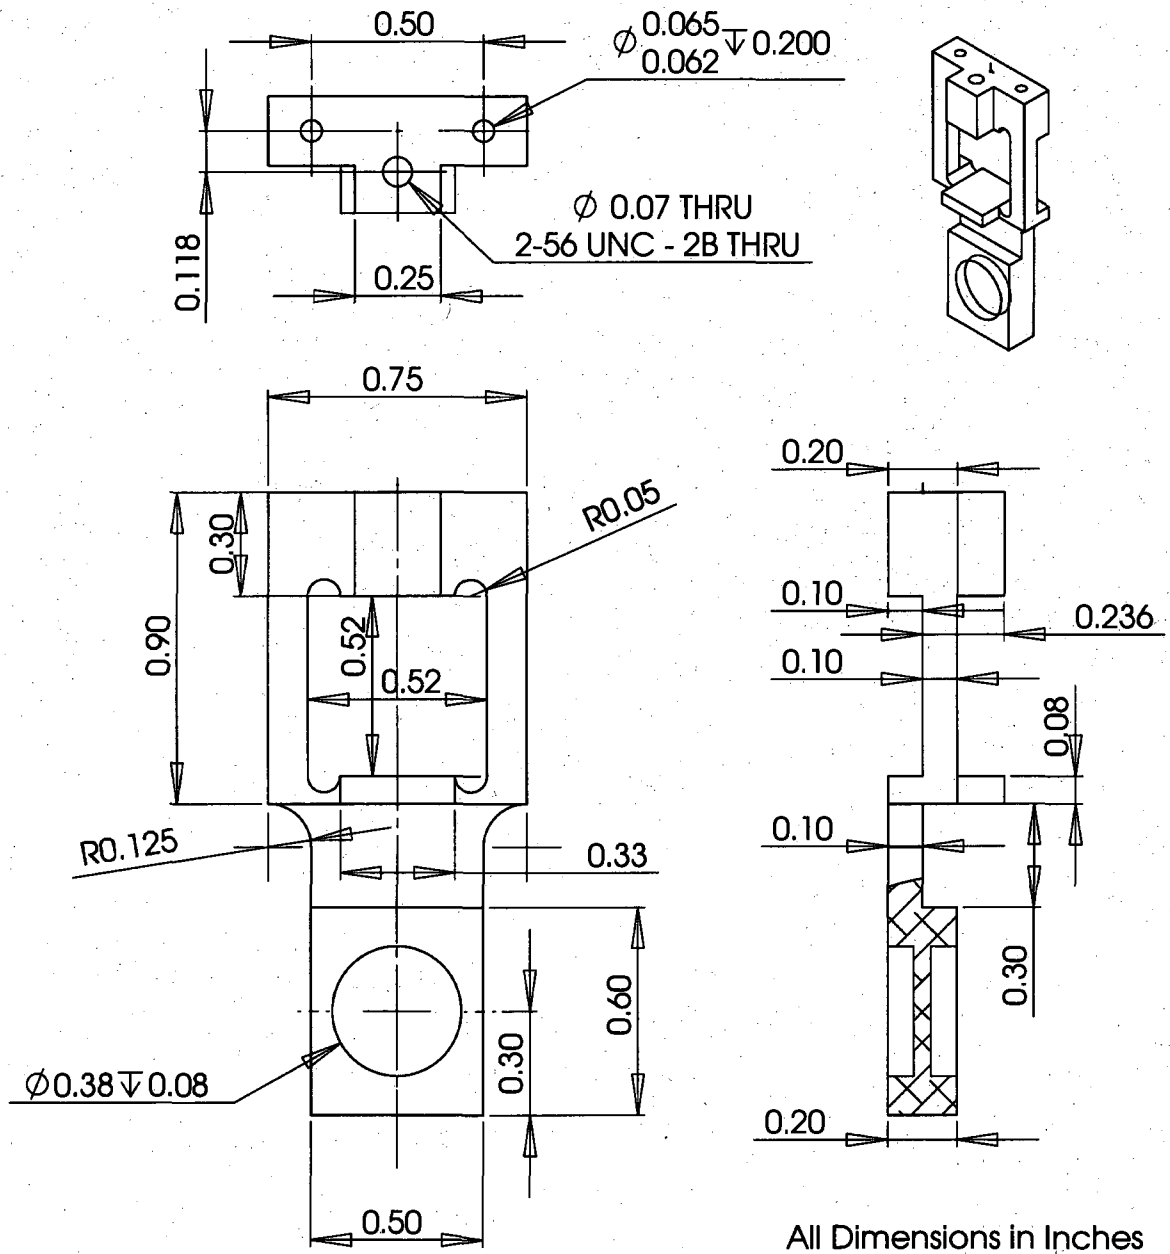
Mechanical Drawing: Grating and magnet mount bottom part.
